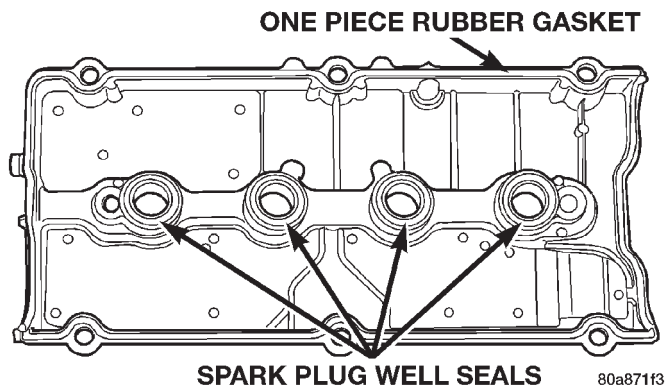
Cylinder Head Cover Gasket and Spark Plug Seals
